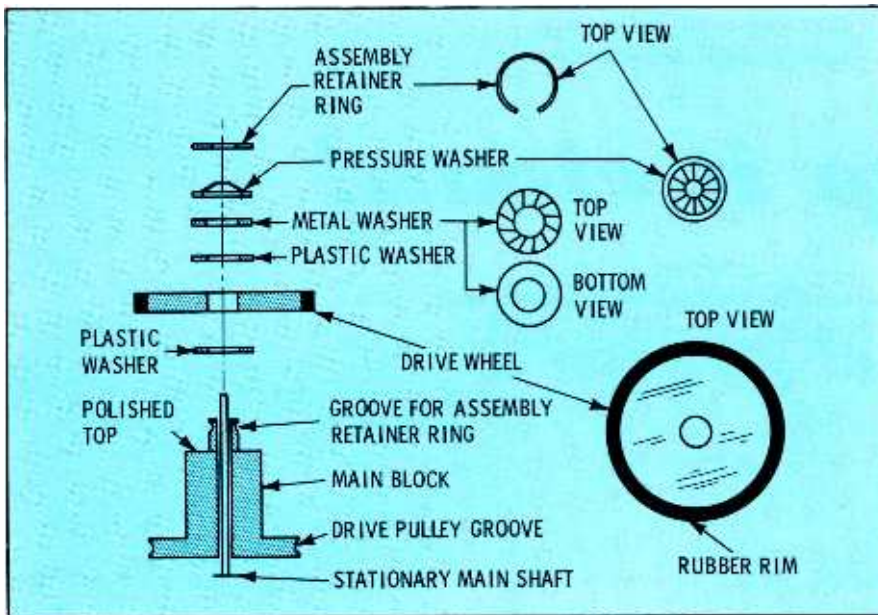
Blown-up view showing parts of a typical surge-clutch assembly.
